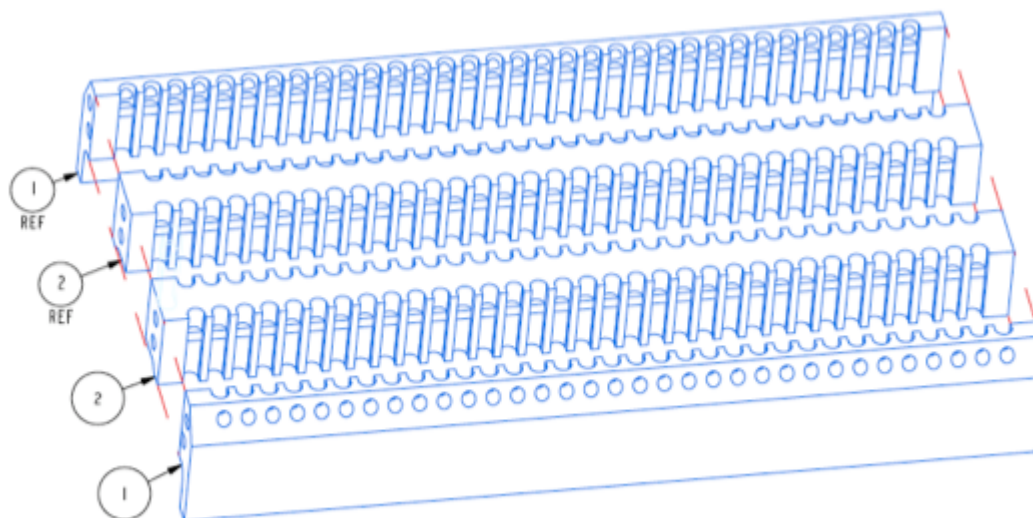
Exploded view of probe cassette, showing all four un-joined pieces
